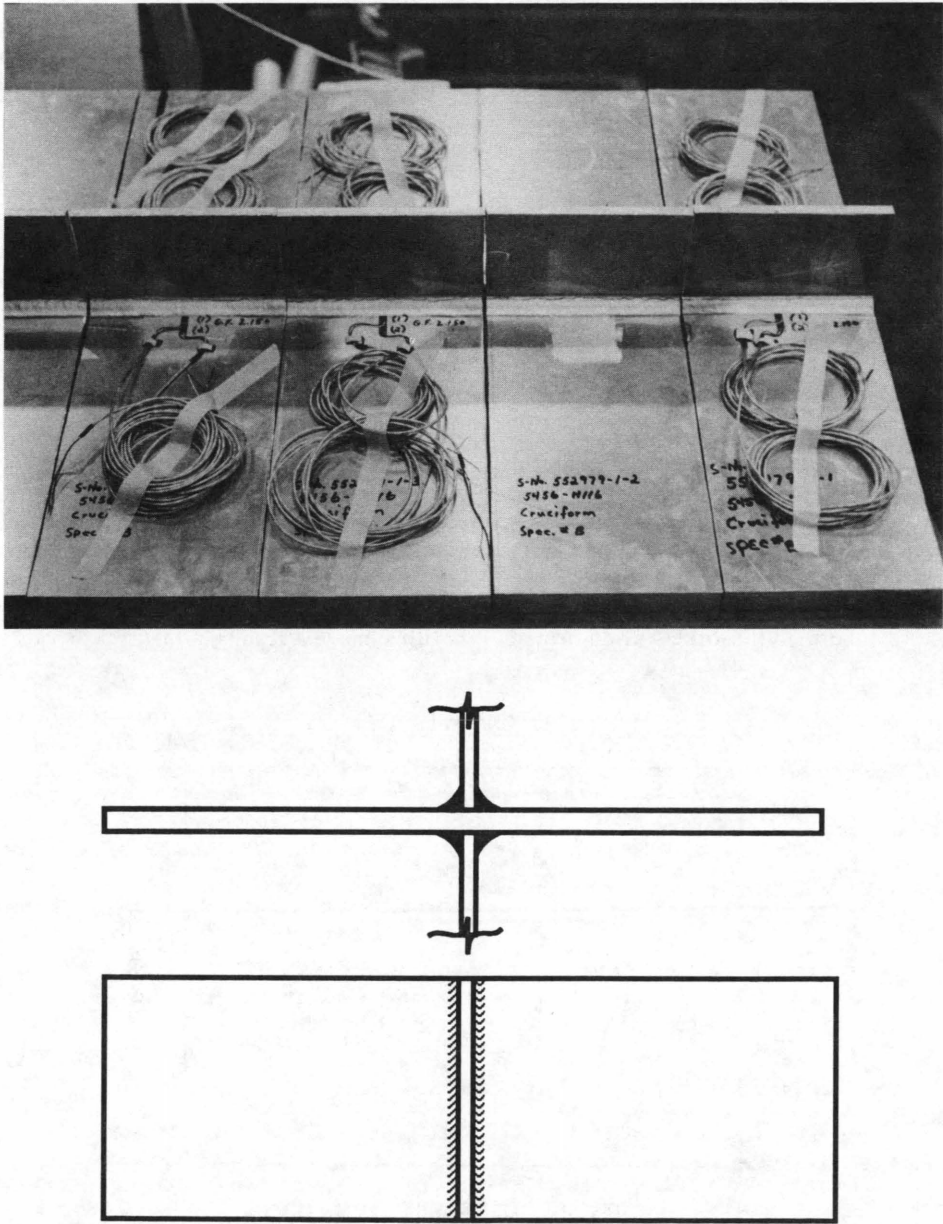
Cruciform joint: top, photograph of cruciform joints cut from plate; bottom, schematic of cruciform joint test specimens.
